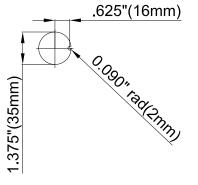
Cover Mounted Bayonet Fuse Holder Mounting Hole Dimensions
